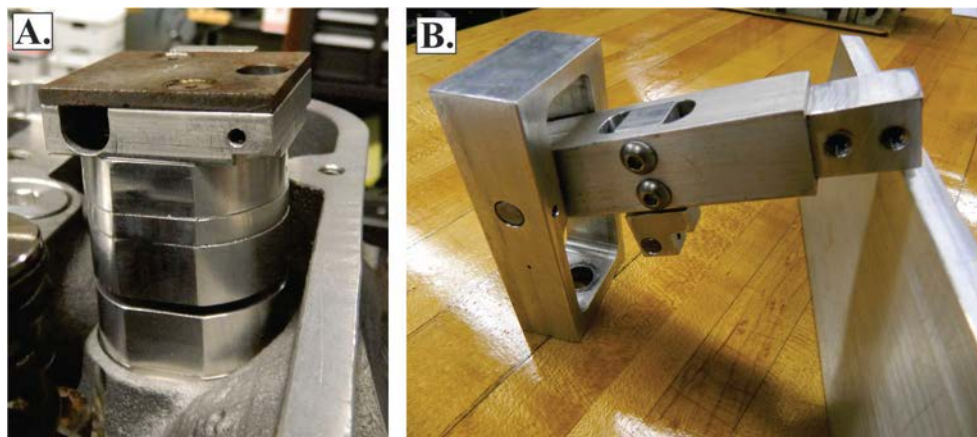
Exhaust Valve Holder (A) and Valve Actuator Assembly (B).
